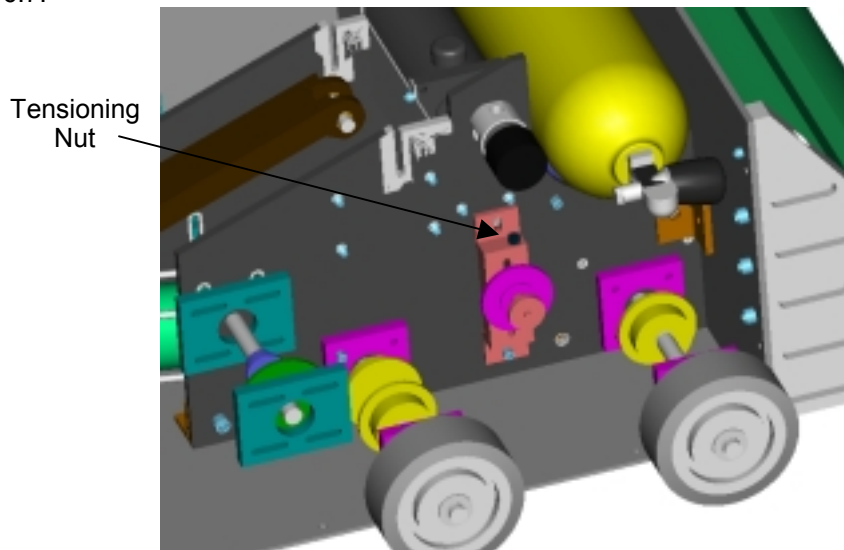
Tension Device for Front and Rear Wheel Shaft
